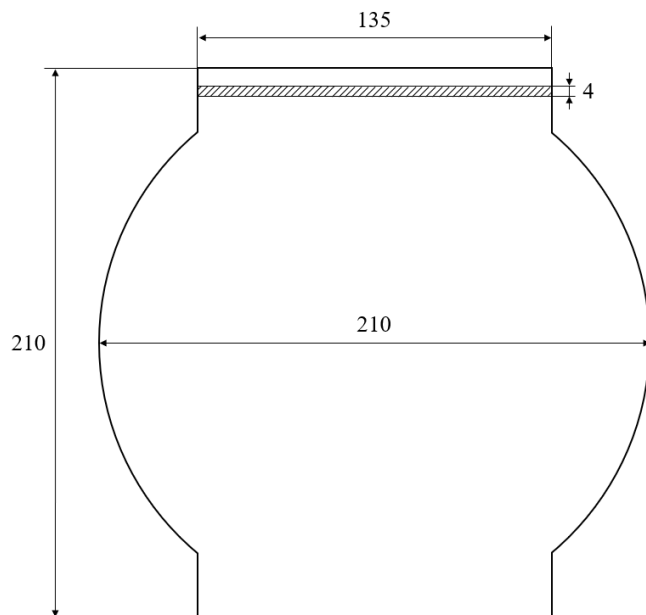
Printed plate design for machining of a set of five type 1B tensile test specimens that can contain all specimen orientations. Dimensions are expressed in millimeter.
